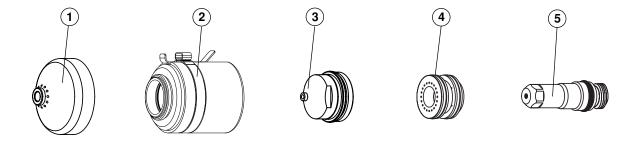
HySpeed HT2000 Starter Consumable Parts
